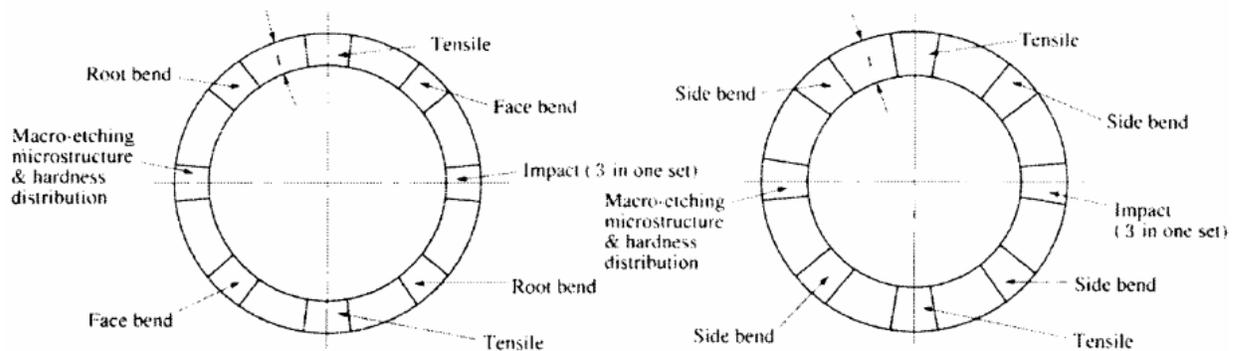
Welding Procedure Qualification Test Assemblies
